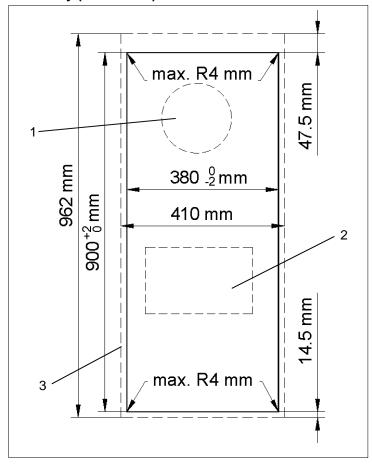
Switch cabinet exterior view DTI cooling unit cut-outs
